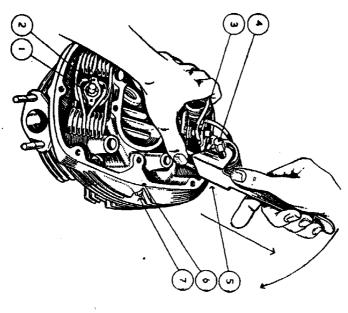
ALTERNATIVE TYPE OF TOOL TO THAT SHOWN IN FIG. 5 FOR VALVE-SPRING REMOVAL.
